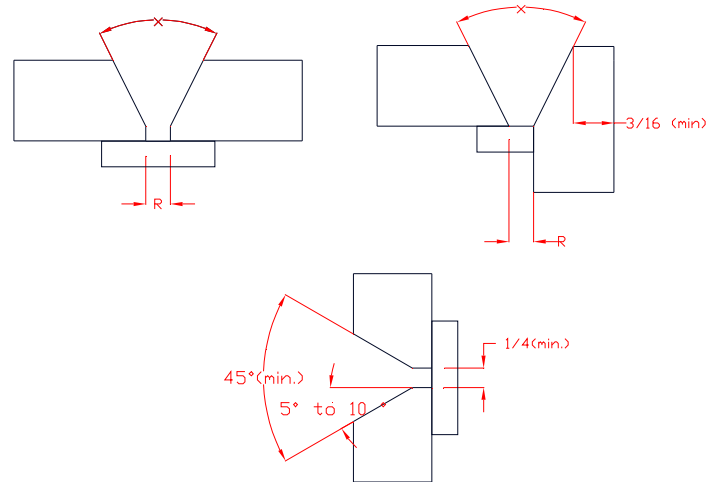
b Square-V groove joints for welding one with backing.
